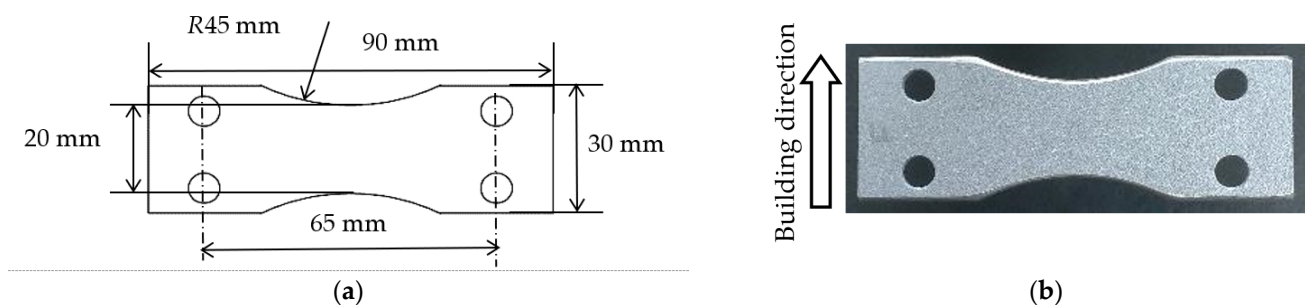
Geometry of plane bending fatigue specimen manufactured via PBF-LS/AlSi10Mg: (a) schematic of specimen (the thickness is 3 mm), (b) photograph of as-built specimen.
